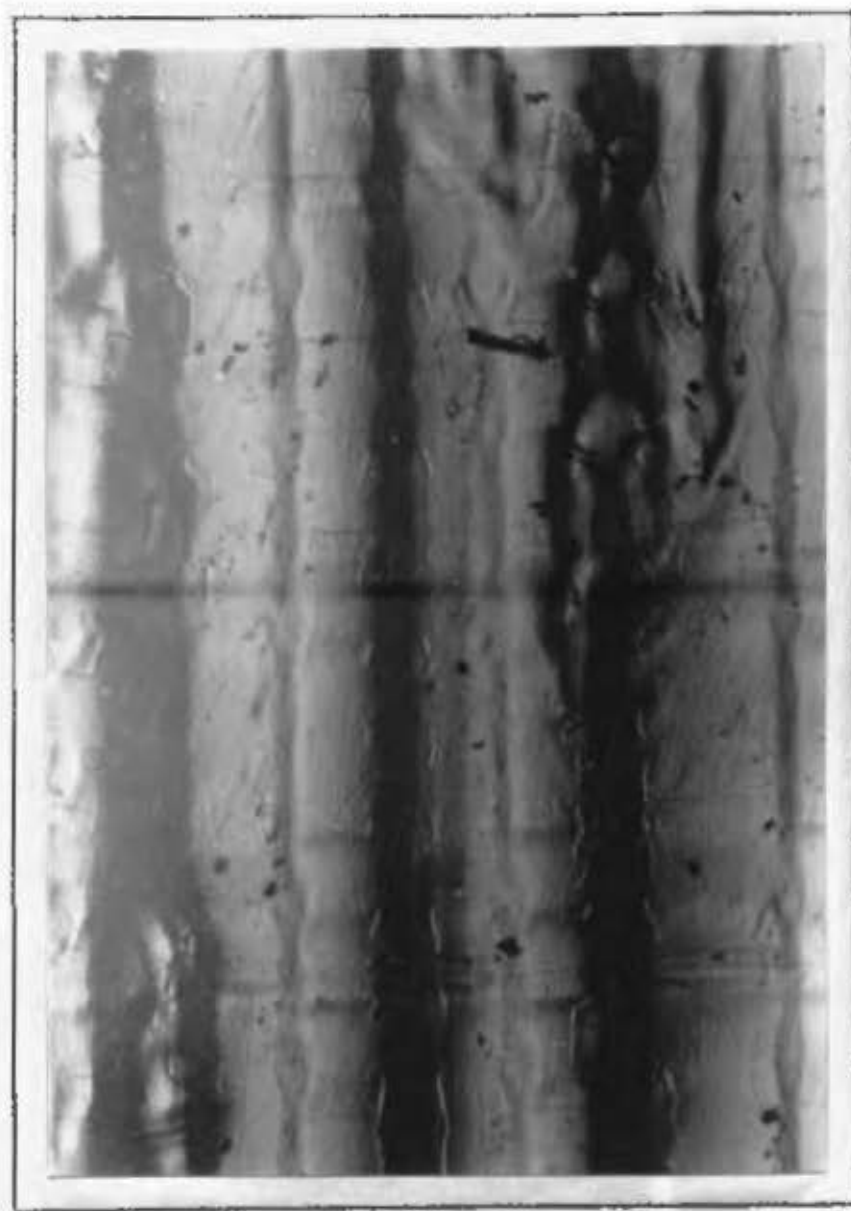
Fracture surface indicating hair-like discontinuities
